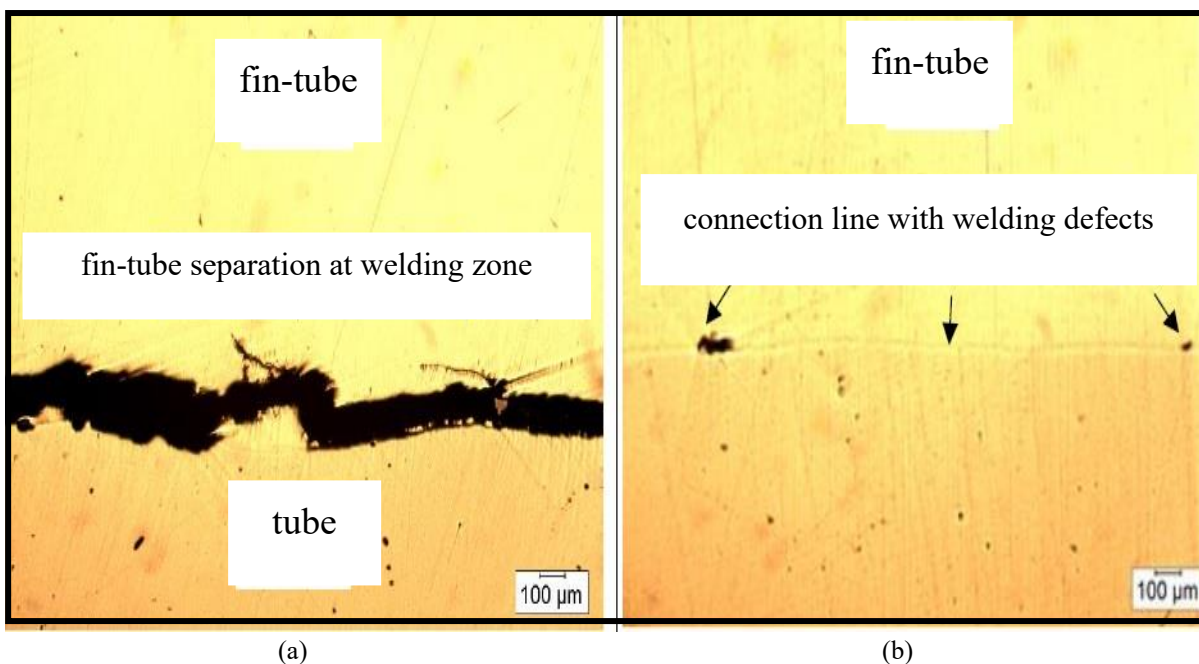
(a) Fin-tube separation at the welding zone, and (b) welding defects along the fin-tube connection line
